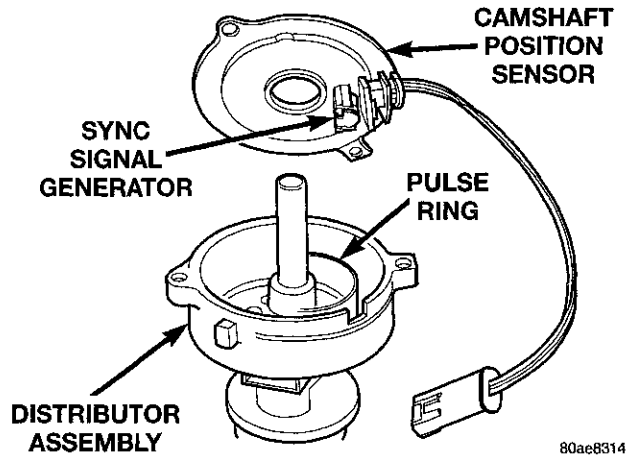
Camshaft Position Sensor—3.9L/5.2L/5.9L Engines
